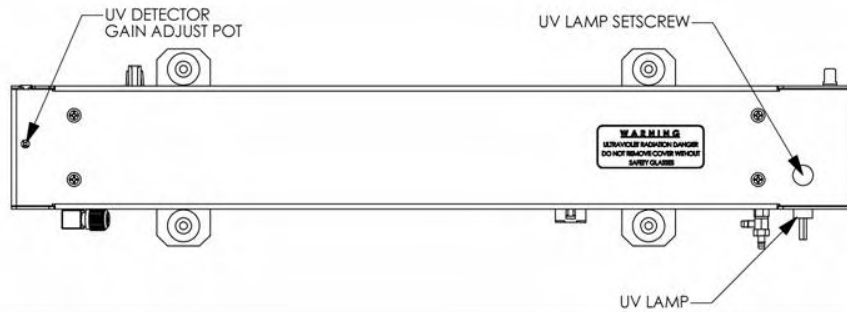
Photometer Assembly – Lamp Adjustment / Installation
